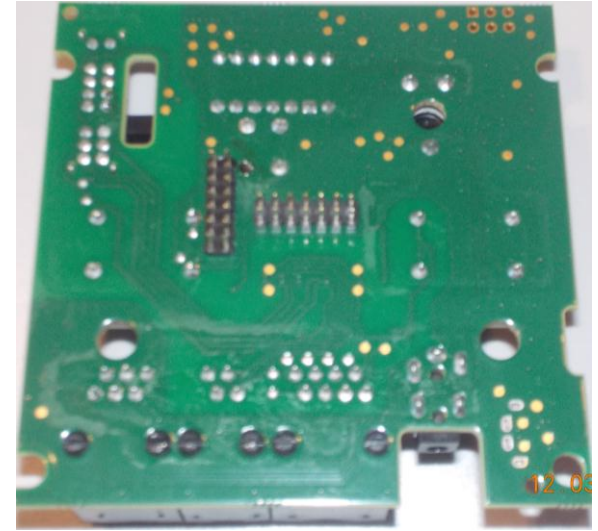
New IFB PCB bottom view in D 10 BS PHONE-US
